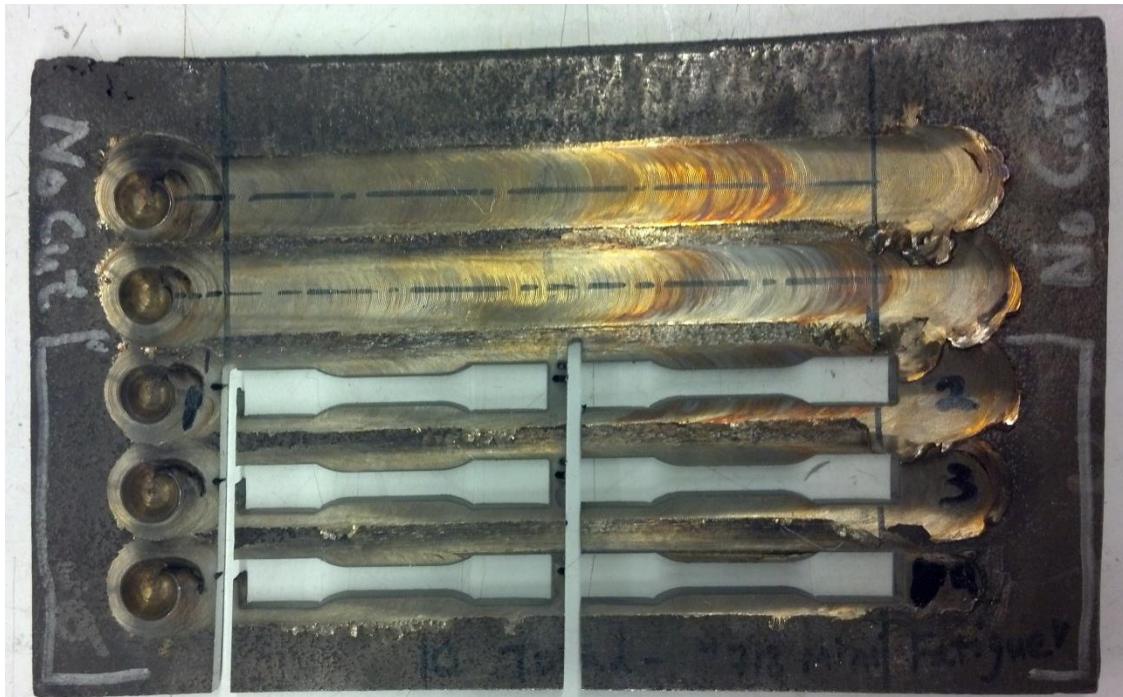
718 Alloy Plate with Friction Stir Processing zones, and As-Cast zones (Author's Work)
